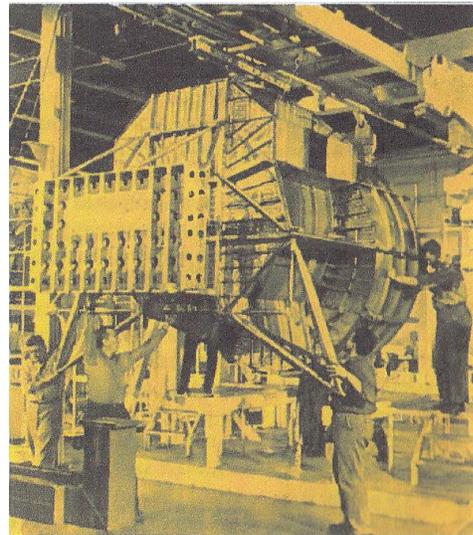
(right): LM Ascent Stage (rear) welding [Sciaky at Work Vol. 9 no. 2].
